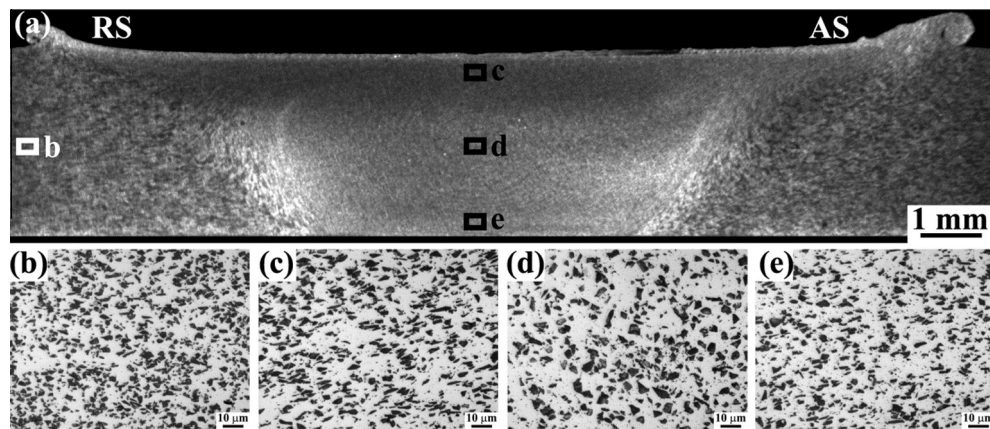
Fig. 2 Optical images of R1500: (a) macrograph of the weld, (b) base material, (c) top of nugget zone, (d) center of nugget zone, (e) bottom of nugget zone. The locations of (b)–(e) are shown in (a) (RS: retreating side and AS: advancing side).
